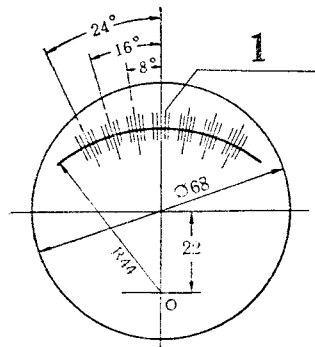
Dial for Checking Turn-And-Slip Indicator
